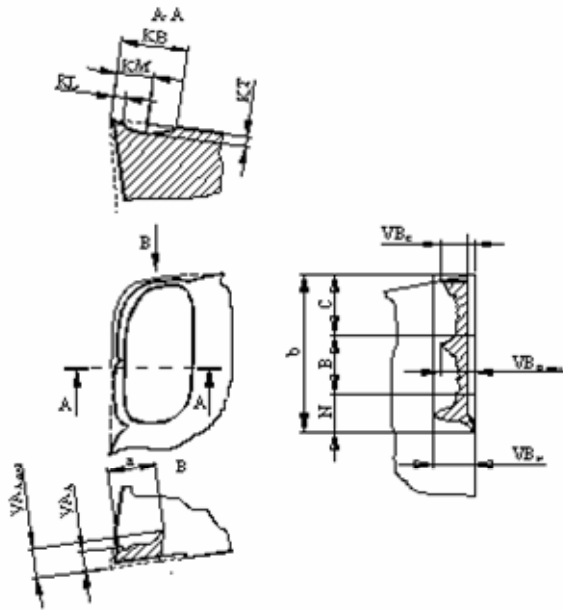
Dimensions characterizing the lathe tool wear [6]
